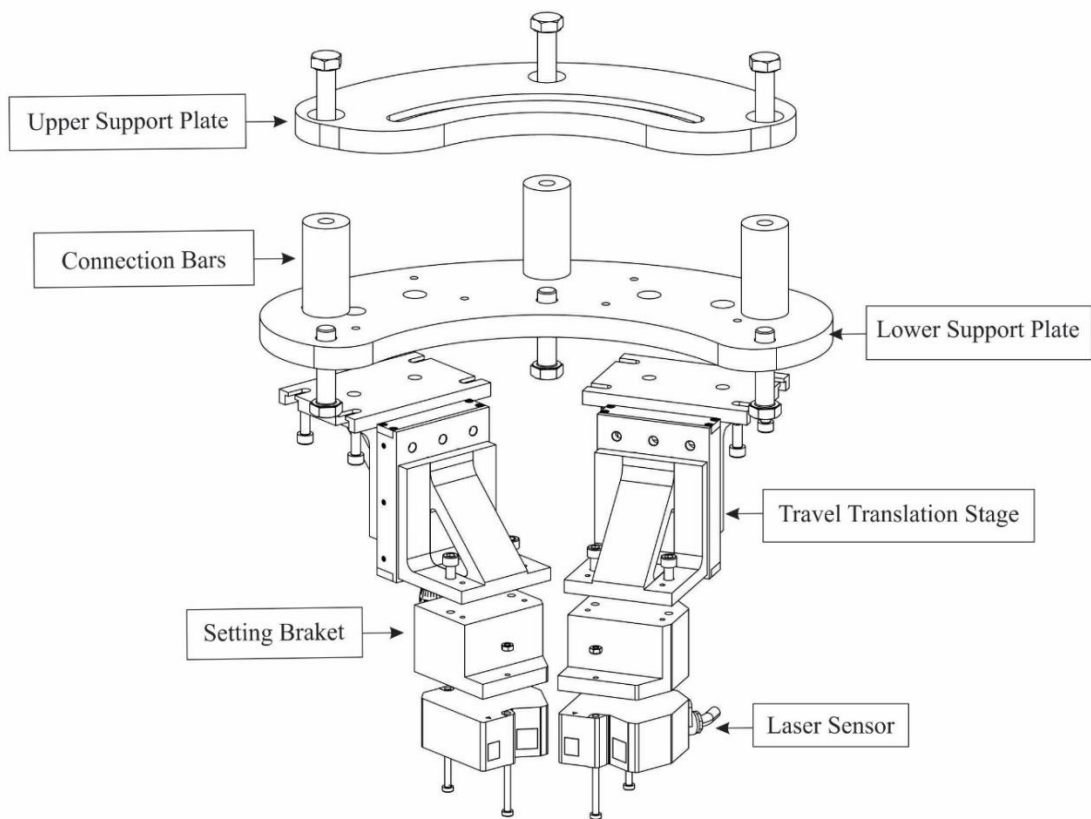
Exploded view of the laser displacement sensor fixture
